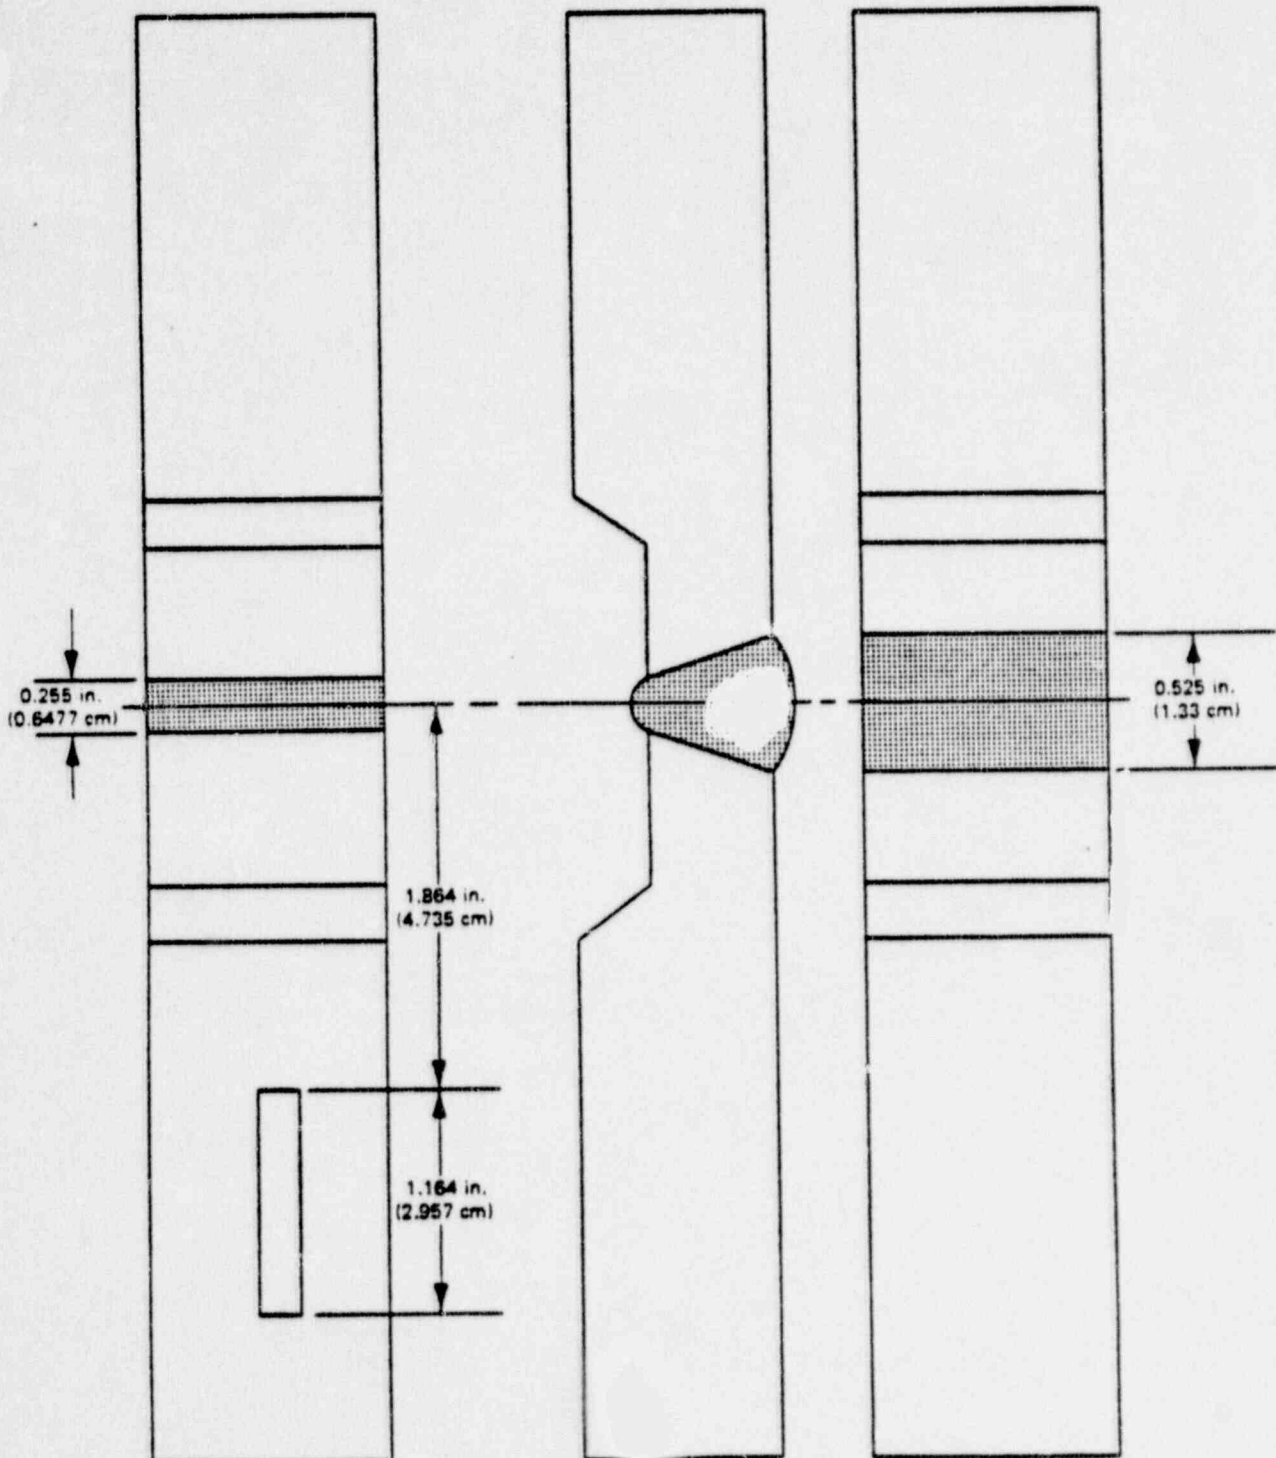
Location of Weldable Strain Gage on 10.16-cm (4-in.) Pipe Specimen (As-Welded)
